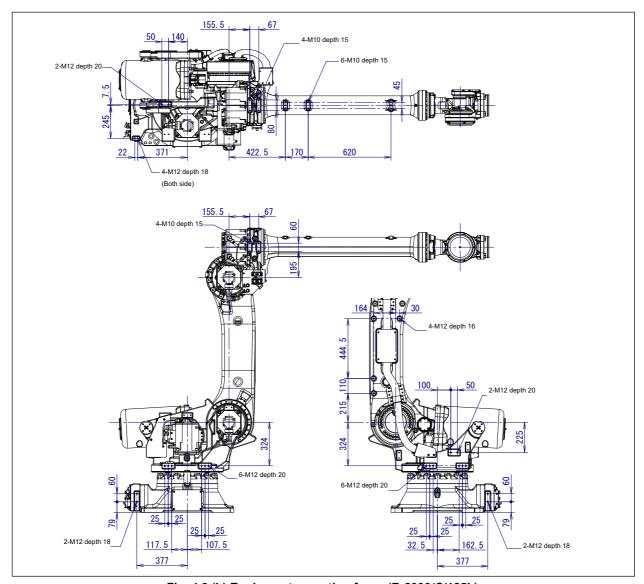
(b) Equipment mounting faces (R-2000*i*C/125L)
